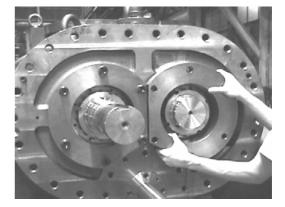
Thrust bearing gland(1) Fig. 3-27 Thrust bearing gland(2)
